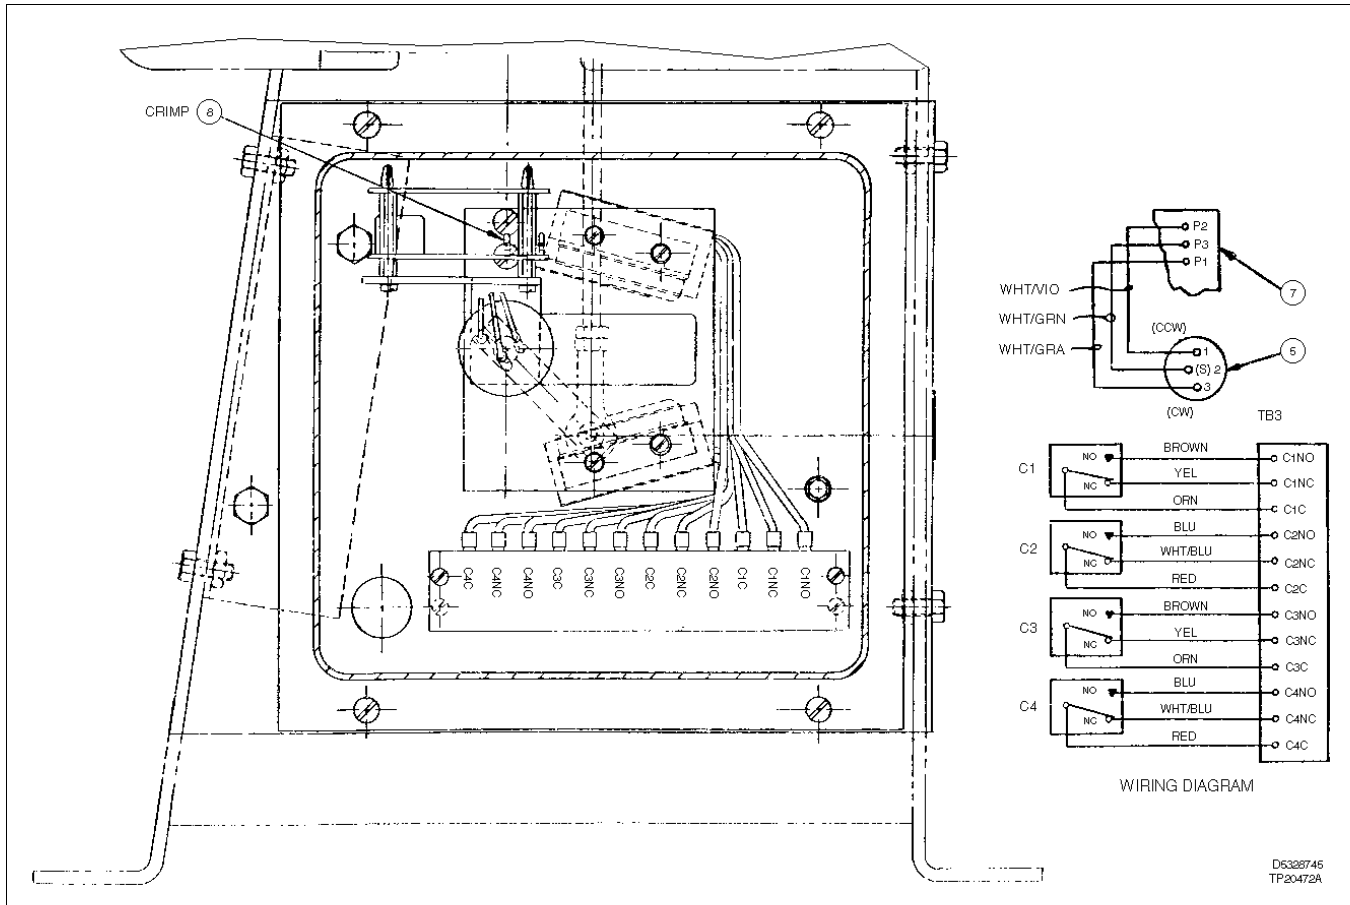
UP1 Electric Shaft Position Transmitter Kit, Table A-6 (Sheet 2 of 2)
